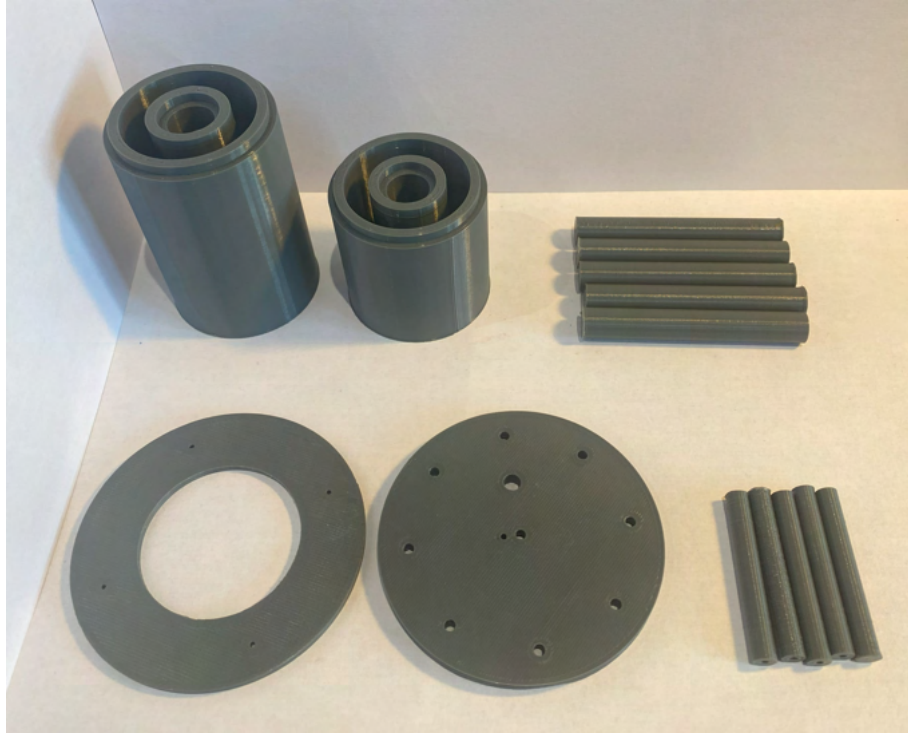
3D printed mock-ups used to validate assembly, fit, and robustness of the CAD model.
